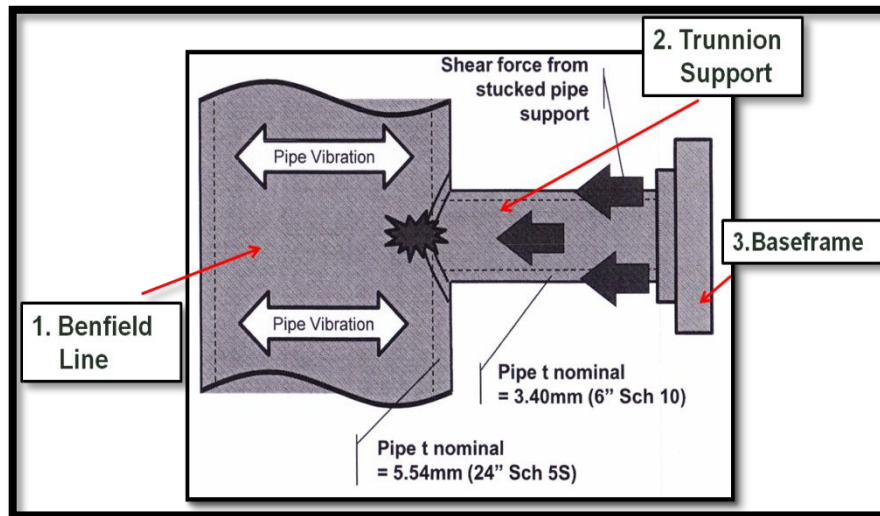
Failure of Trunnion Support due to pipe vibration
